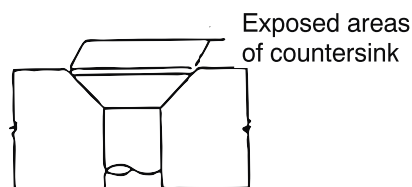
PARTIALLY EXPOSED COUNTERSINK
